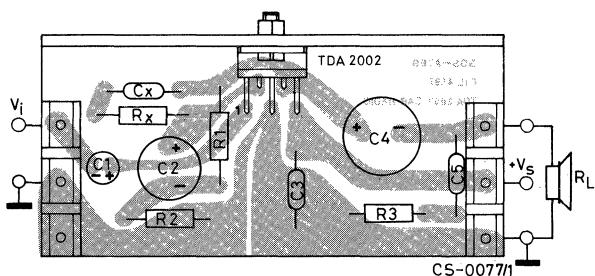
P.C. board and component layout for the circuit of fig. 16 (1:1 scale)
